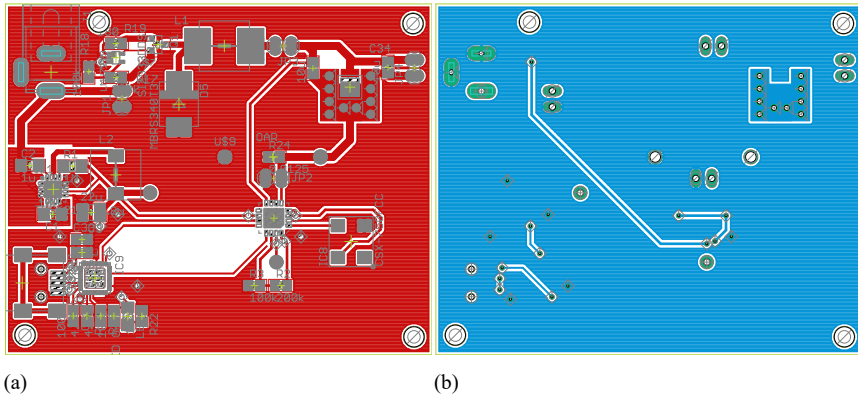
Board layout of the test PCB for the ASIC top (a) and bottom (b)
